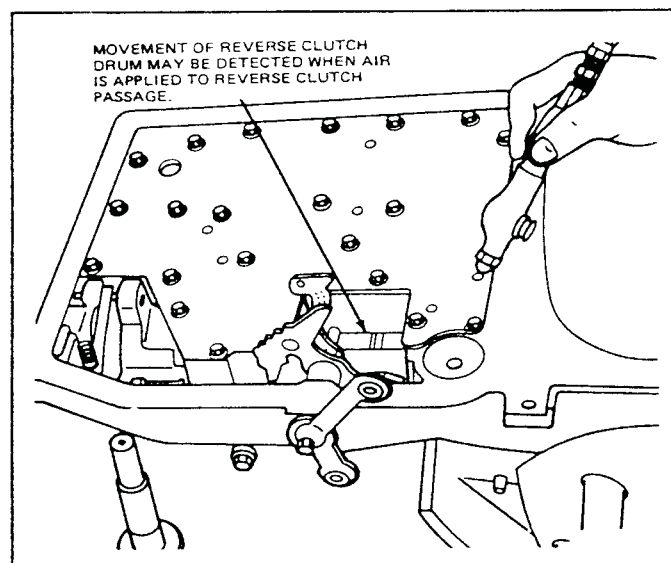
Air Pressure Test—Reverse Clutch—AOD
